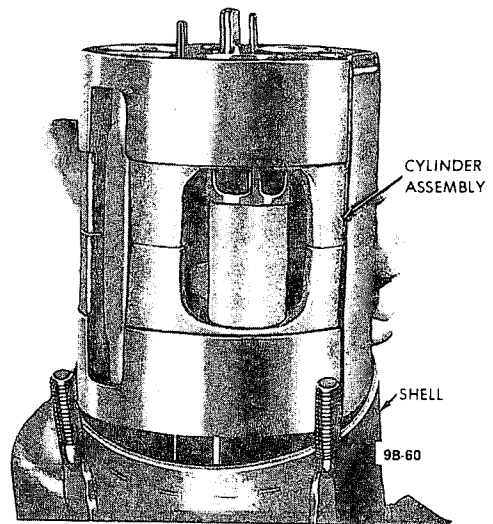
B-85 Removing Internal Cylinder Assembly - 6 Cylinder Compressor
